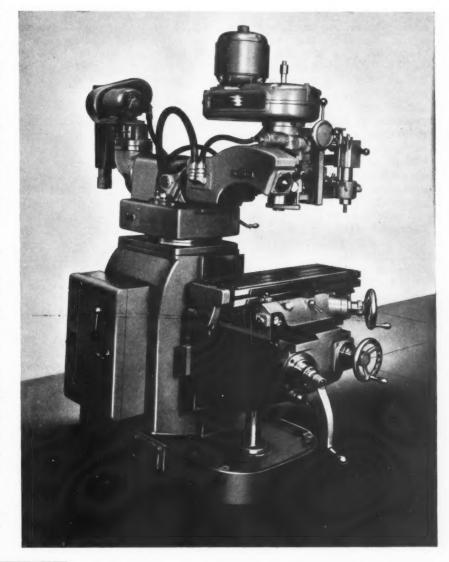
Cincinnati Die Milling Machine Equipped with Sensitive Automatic Depth Control Tracer Mechanism
